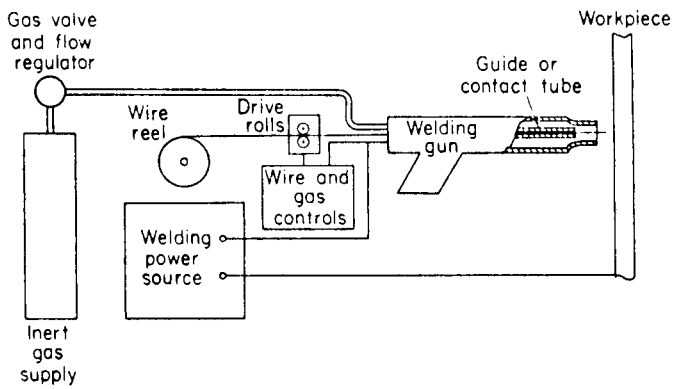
Metal inert gas welding equipment (GMAW) (8).
